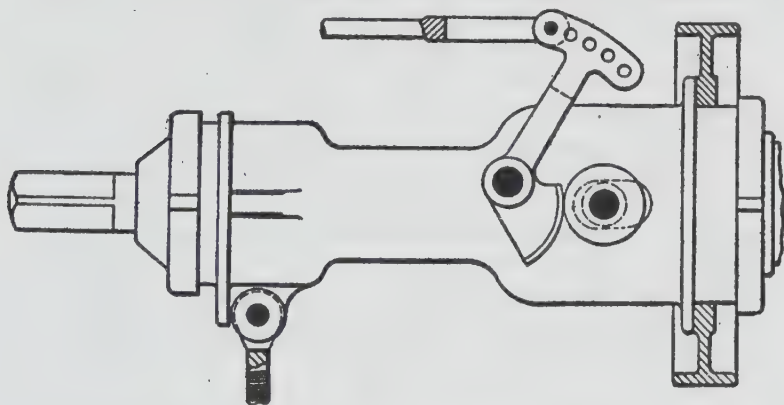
CAM MECHANISM FOR APPLYING DISC TO WHEEL.
